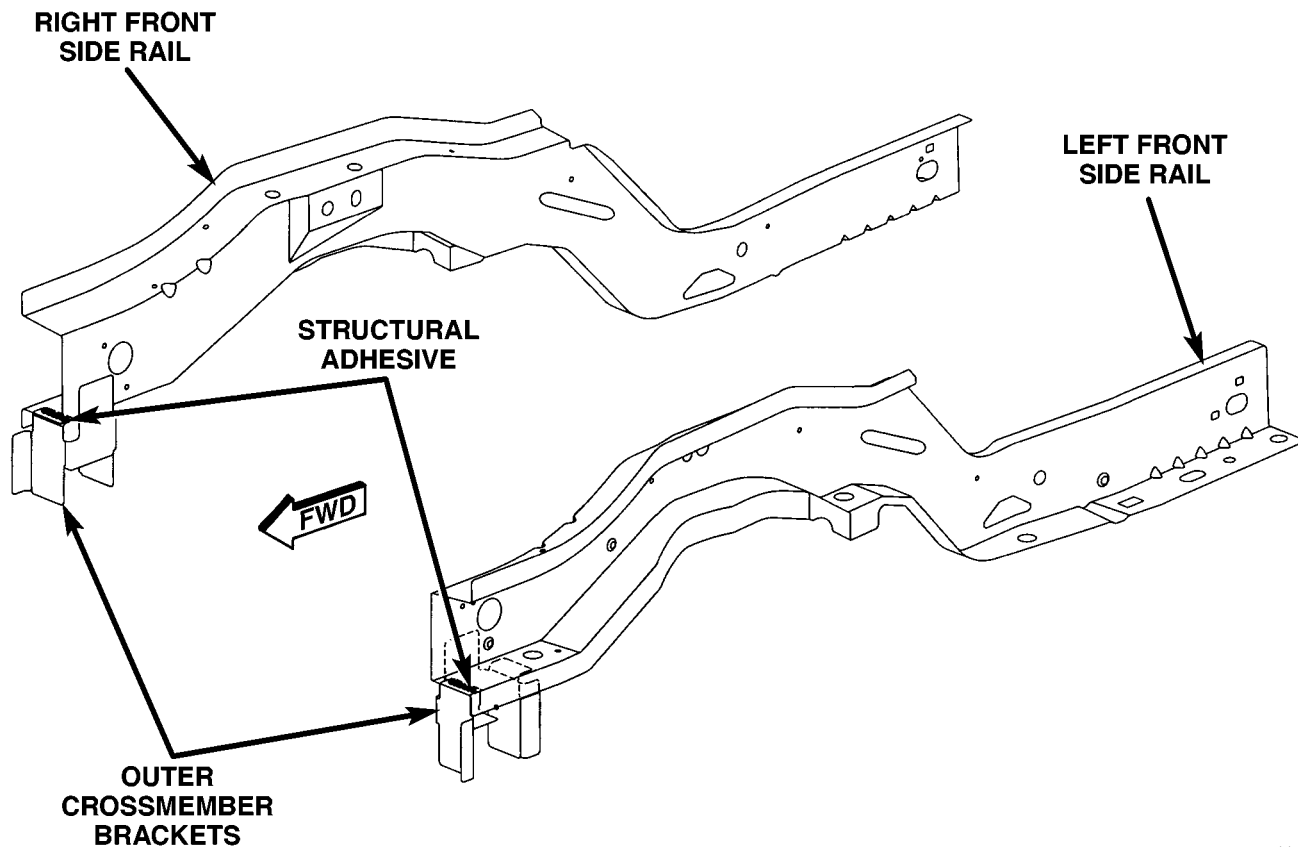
FRONT SIDE RAILS/OUTER CROSS MEMBER BRACKETS
